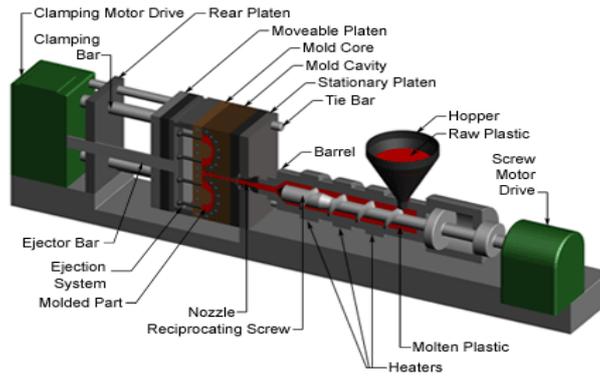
Isometric view and the sectional view of the mold of a Plastic Injection Molding Machine [13].
